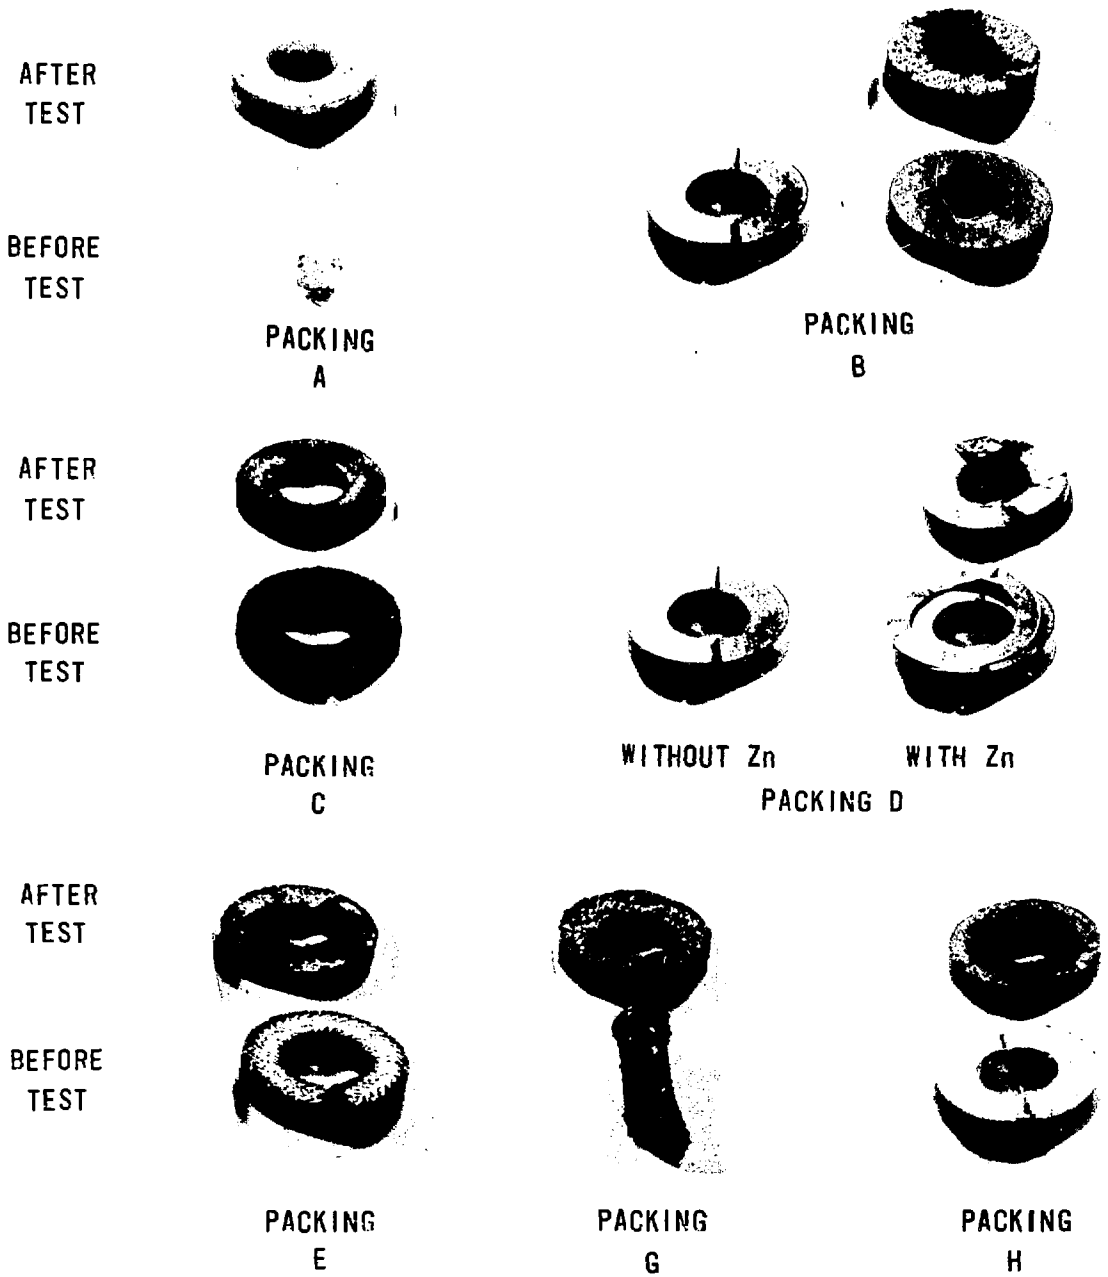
VALVE PACKING APPEARANCE BEFORE AND AFTER TESTING
